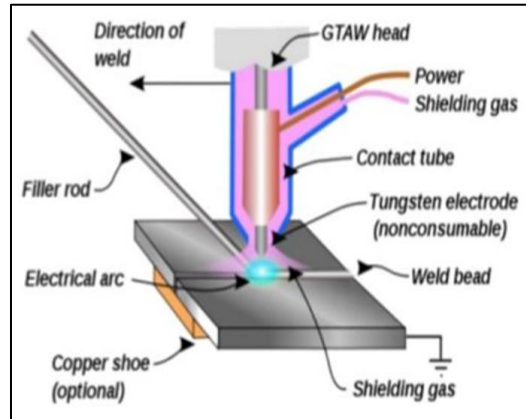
TIG Welding approach/method [Wahule & Wasankar,(2018)]
